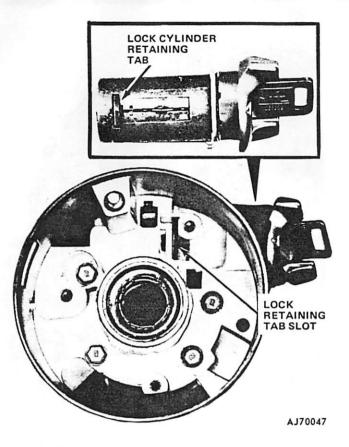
J-9 Lock Cylinder Retaining Tab Location
